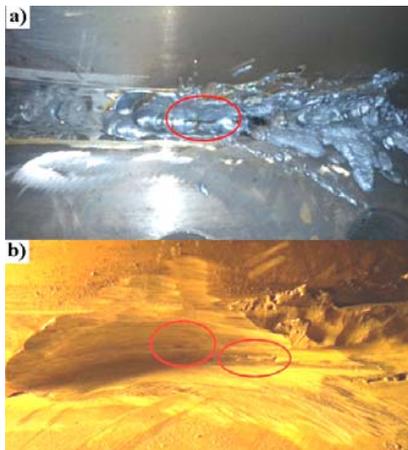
Weld groove of weld seam 1 and no welding process
